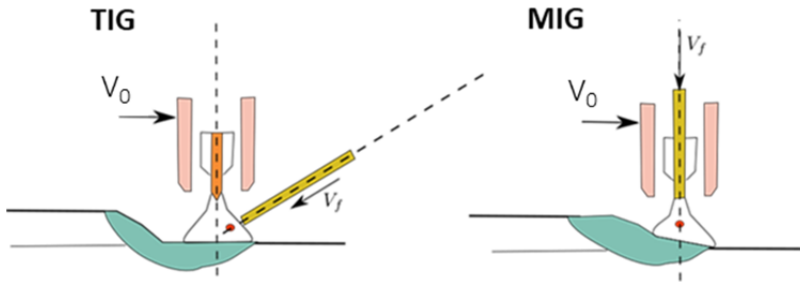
Additive deposit configuration with a TIG or MIG welding machine.
